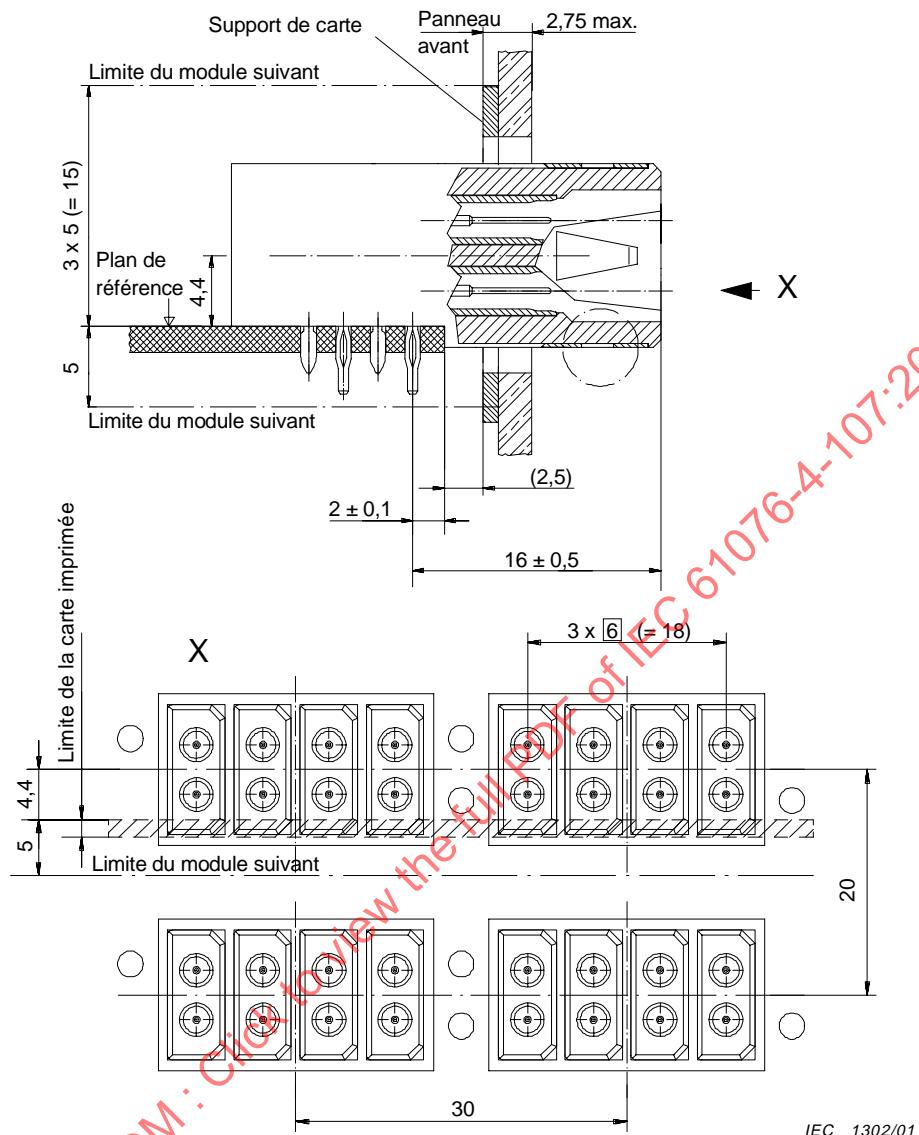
Fixed board connector with standard contacts (style A) panel mounted, packaging information
